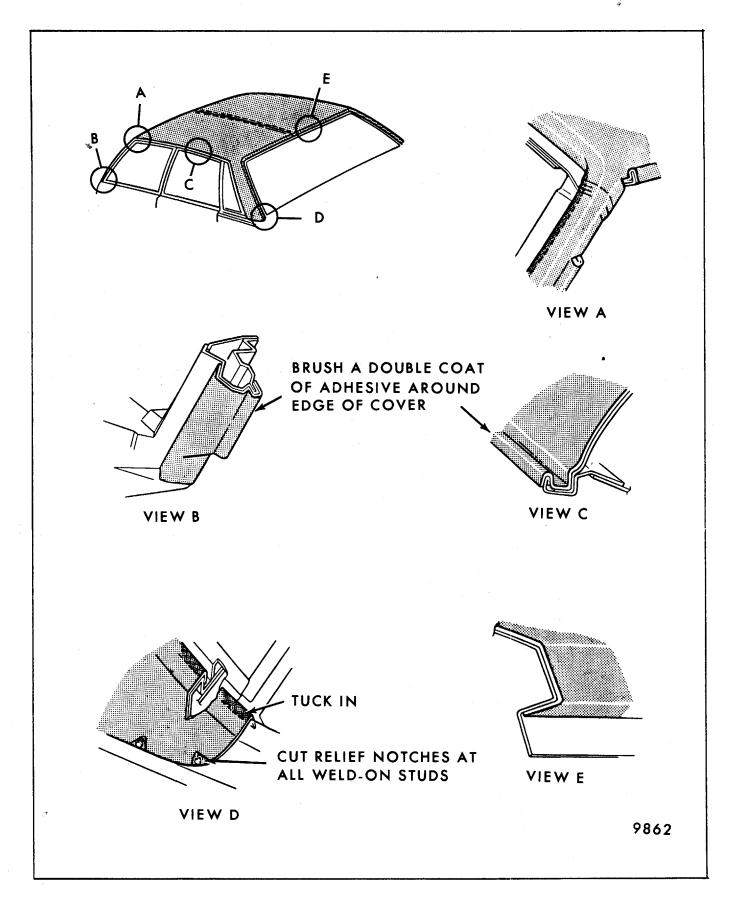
Typical Fabric Roof Cover Installation - A Styles
